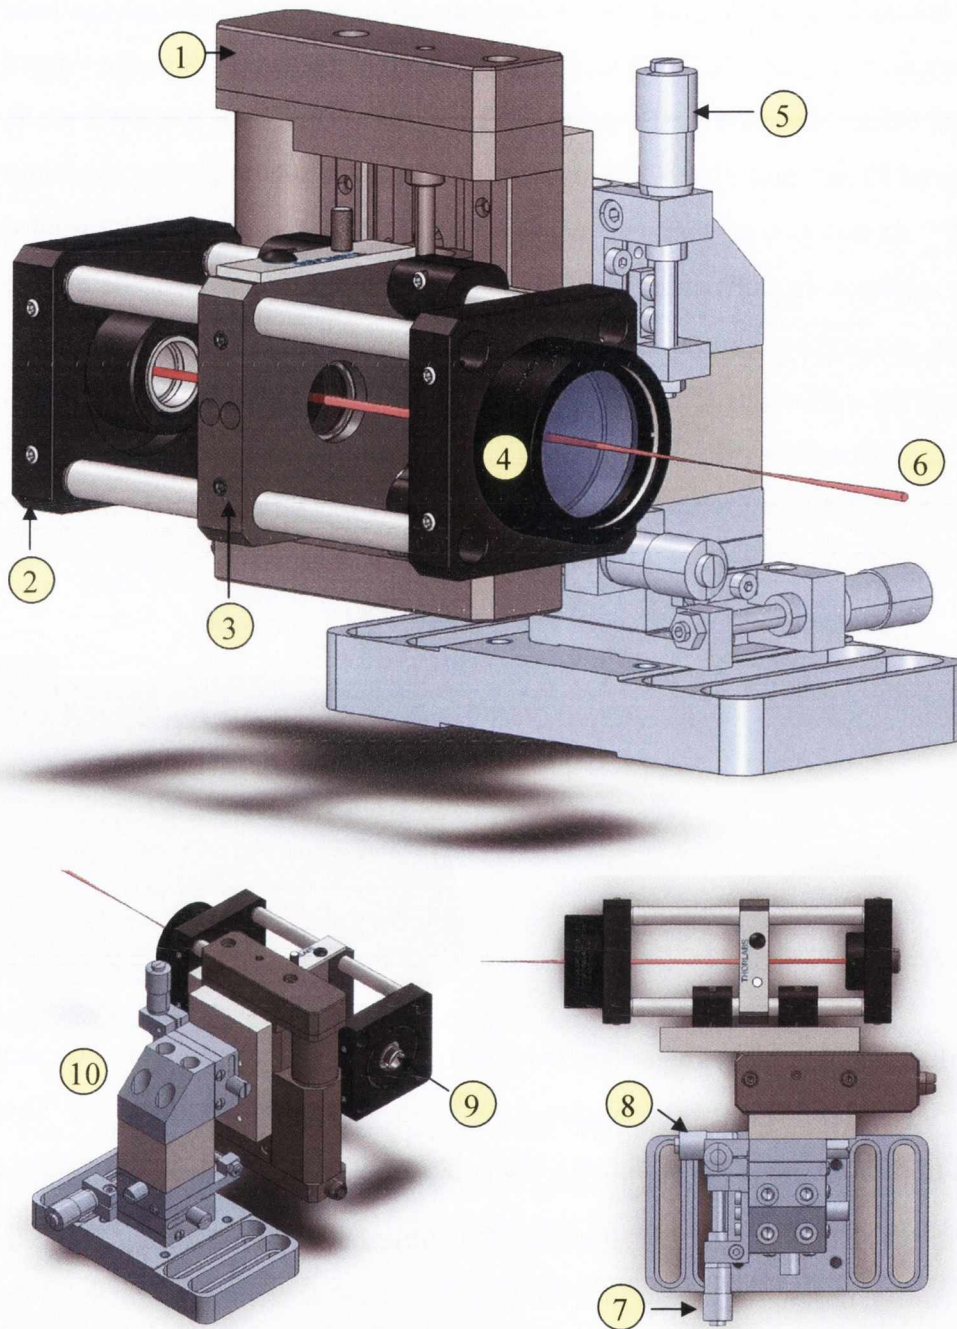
Full assembly of the laser positioning and focussing assembly. 1: Micro-translation stage. 2: Cage Plate (2X). 3: Cage Removable Filter plate with ND1.3 filter. 4: Achromatic doublet focussing unit ( $f = 40$  mm). 5: Micrometer (positioning spot along cantilever width). 6: Laser beam. 7: Micrometer (positioning spot along cantilever length). 8: Micrometer (laser spot focussing on cantilever). 9: Laser fiber coupling to collimation package. 10: XYZ translation stage body
